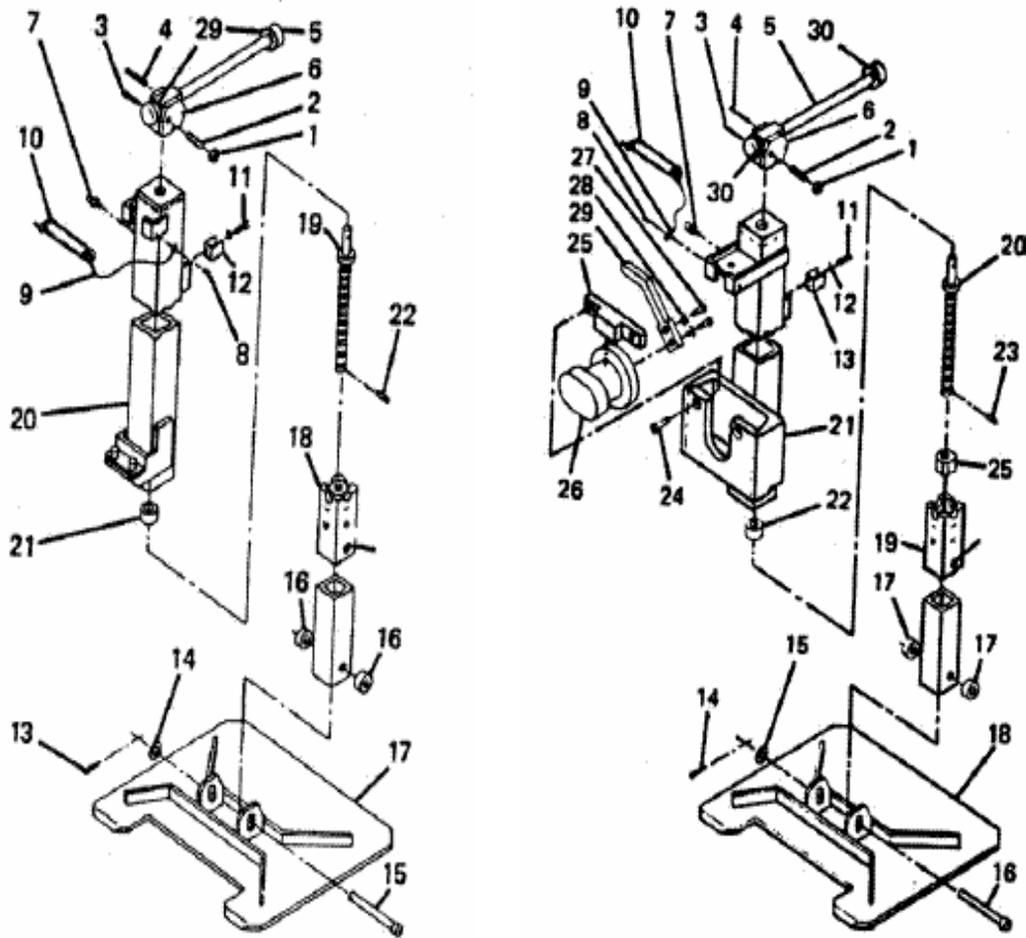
Jack Assembly Hinged	Figure 8-4. Jack Leveling and Support
